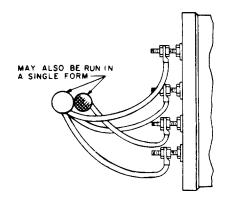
Switches — Multipole Transfer — No. 14 Gauge and Smaller Wires
